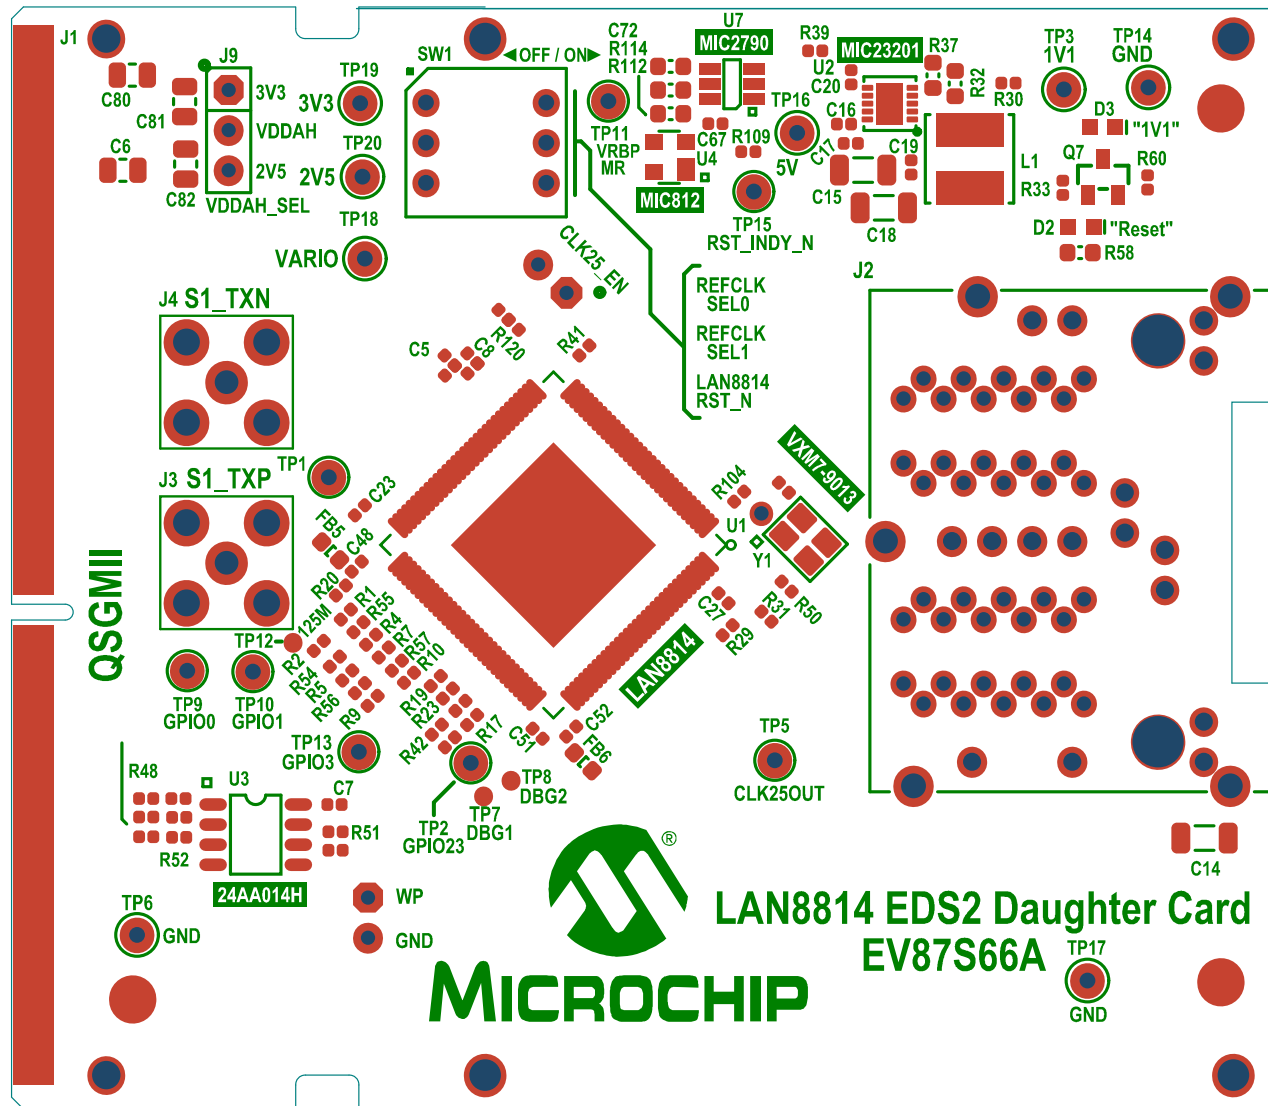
LAN8814 EDS2 DAUGHTER CARD TOP LAYER
